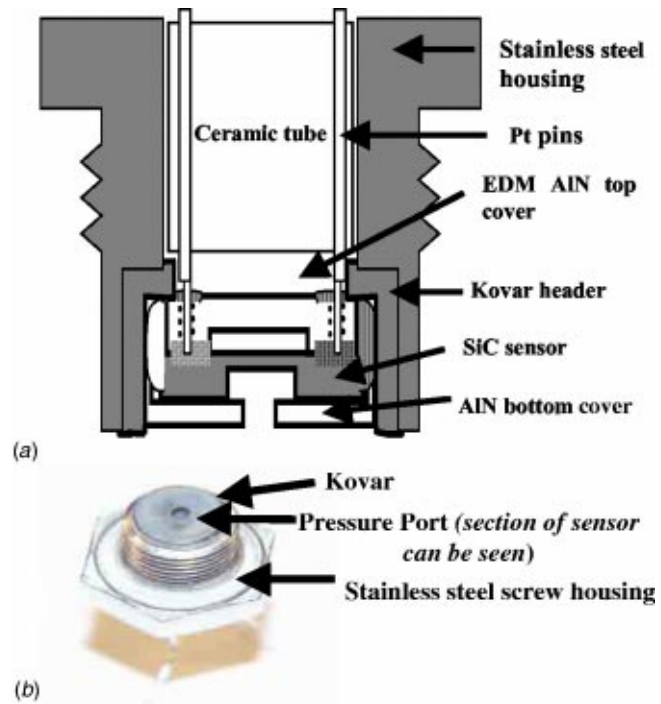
(a) Sub-assembled 6H-SiC sensor unit for insertion into the stainless steel screw housing; (b) fully packaged 6H-SiC pressure transducer with pressure port and pins visible
